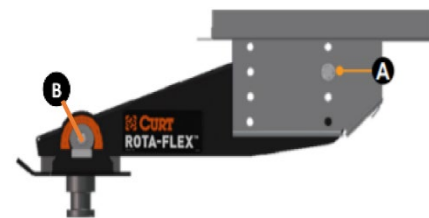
Pin box bolt torque locations. A: Mounting bolts, B: Bearing bolt nuts.
